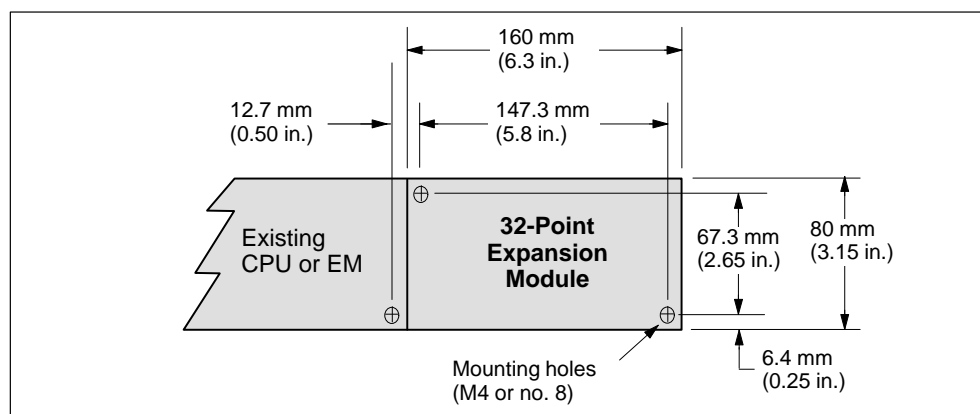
Mounting Dimensions for a 32-Point Expansion Module
